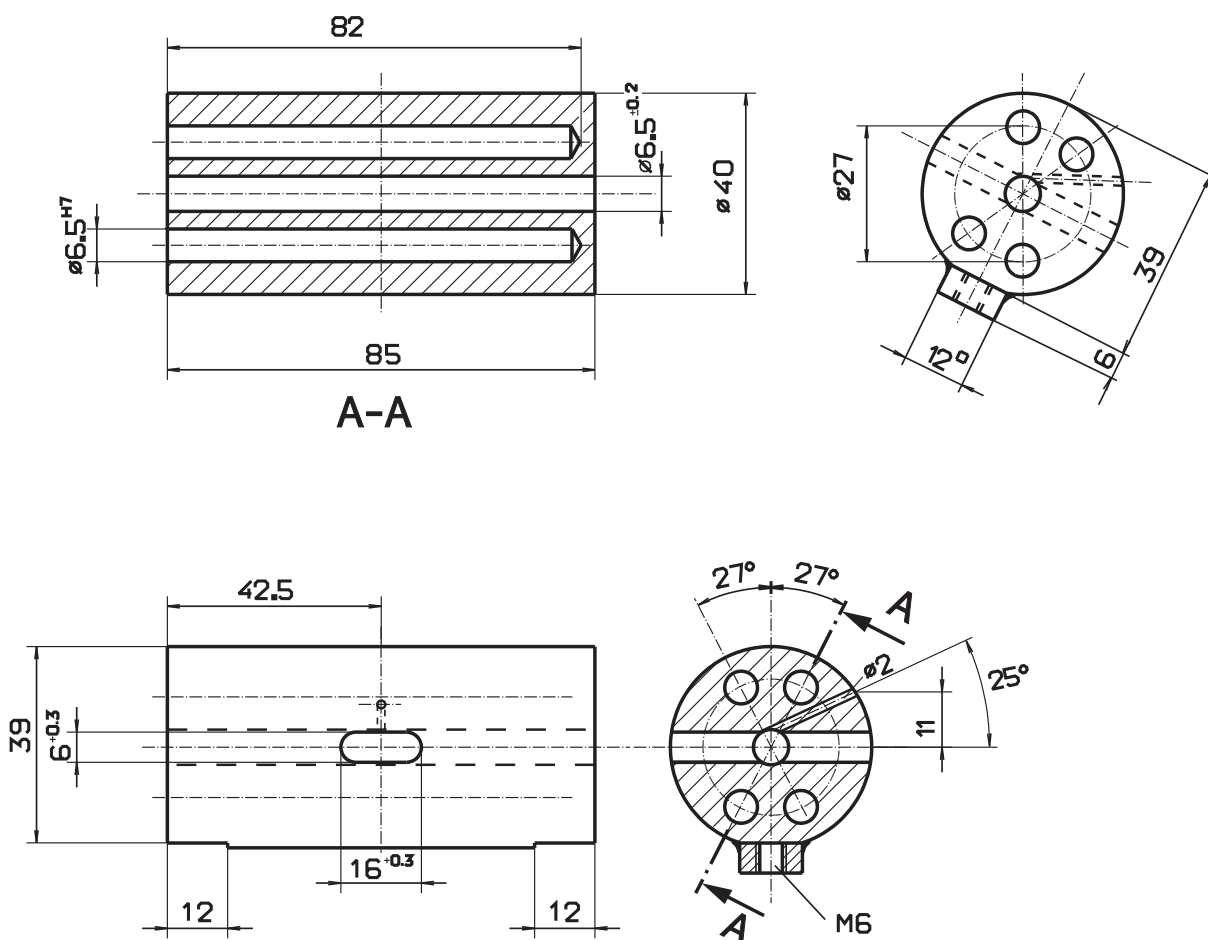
Technical drawing of the inconel alloy heating block of the quartz cell indicating the dimensions in mm
